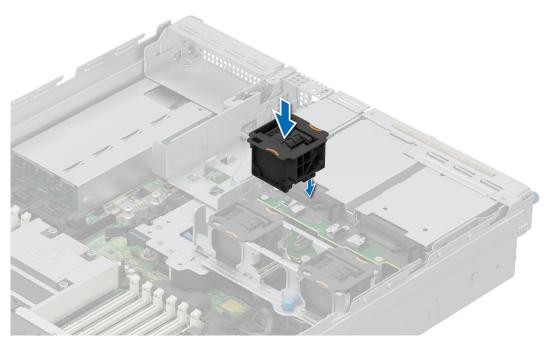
Installing a 4 x 2.5-inch rear drive module cooling fan
